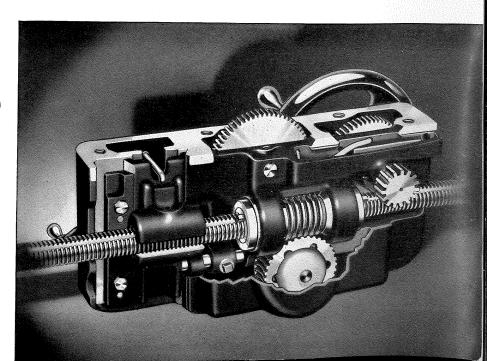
(Above) Cut-away View Showing the Multiple Disc Friction Feed Clutch
